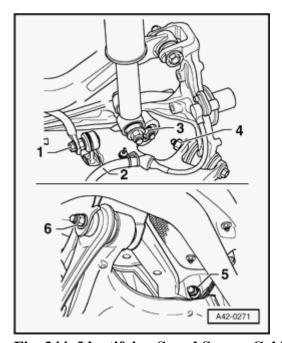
Identifying Speed Sensor Cable Guide, Bolts & Trapezoidal Control Arm
